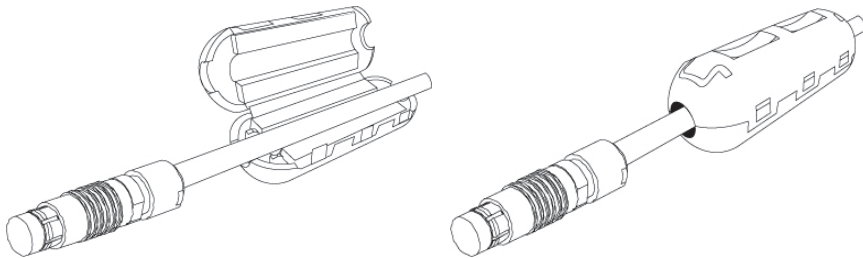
Attaching a ferrite clamp filter to a cable (example shown with the scanner interface cable)
